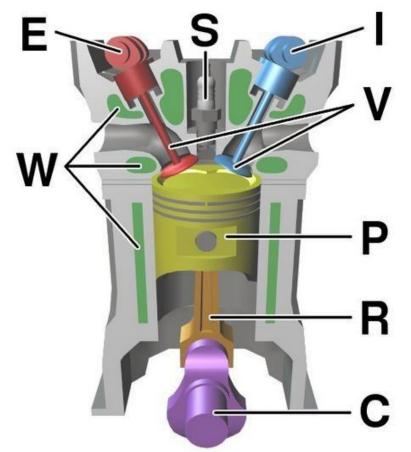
Diagram of a cylinder as found in 4-stroke gasoline engines:C – crankshaft,E – exhaust camshaft, I – inlet camshaft,P – piston,R – connecting rod,S
